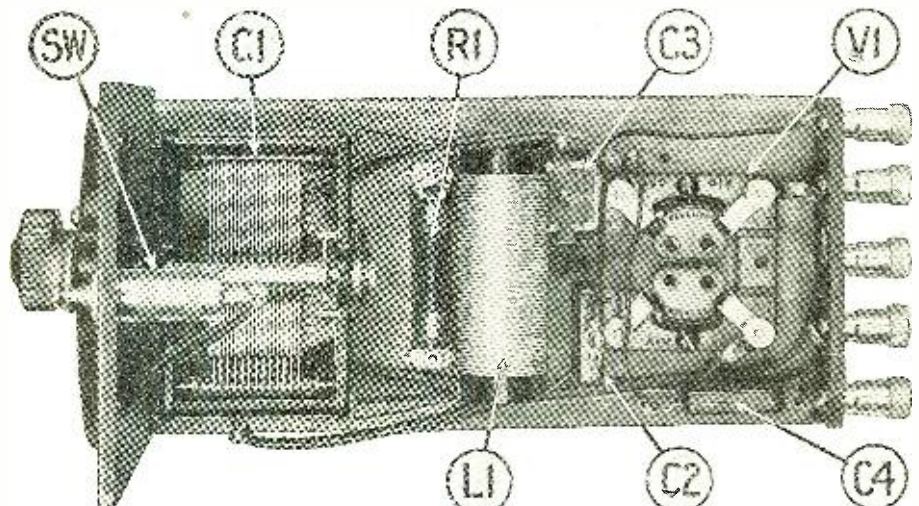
Fig. B. Top view of booster unit with shield removed, showing position of parts on sub-base. The tuning coil C1 is home-made.
